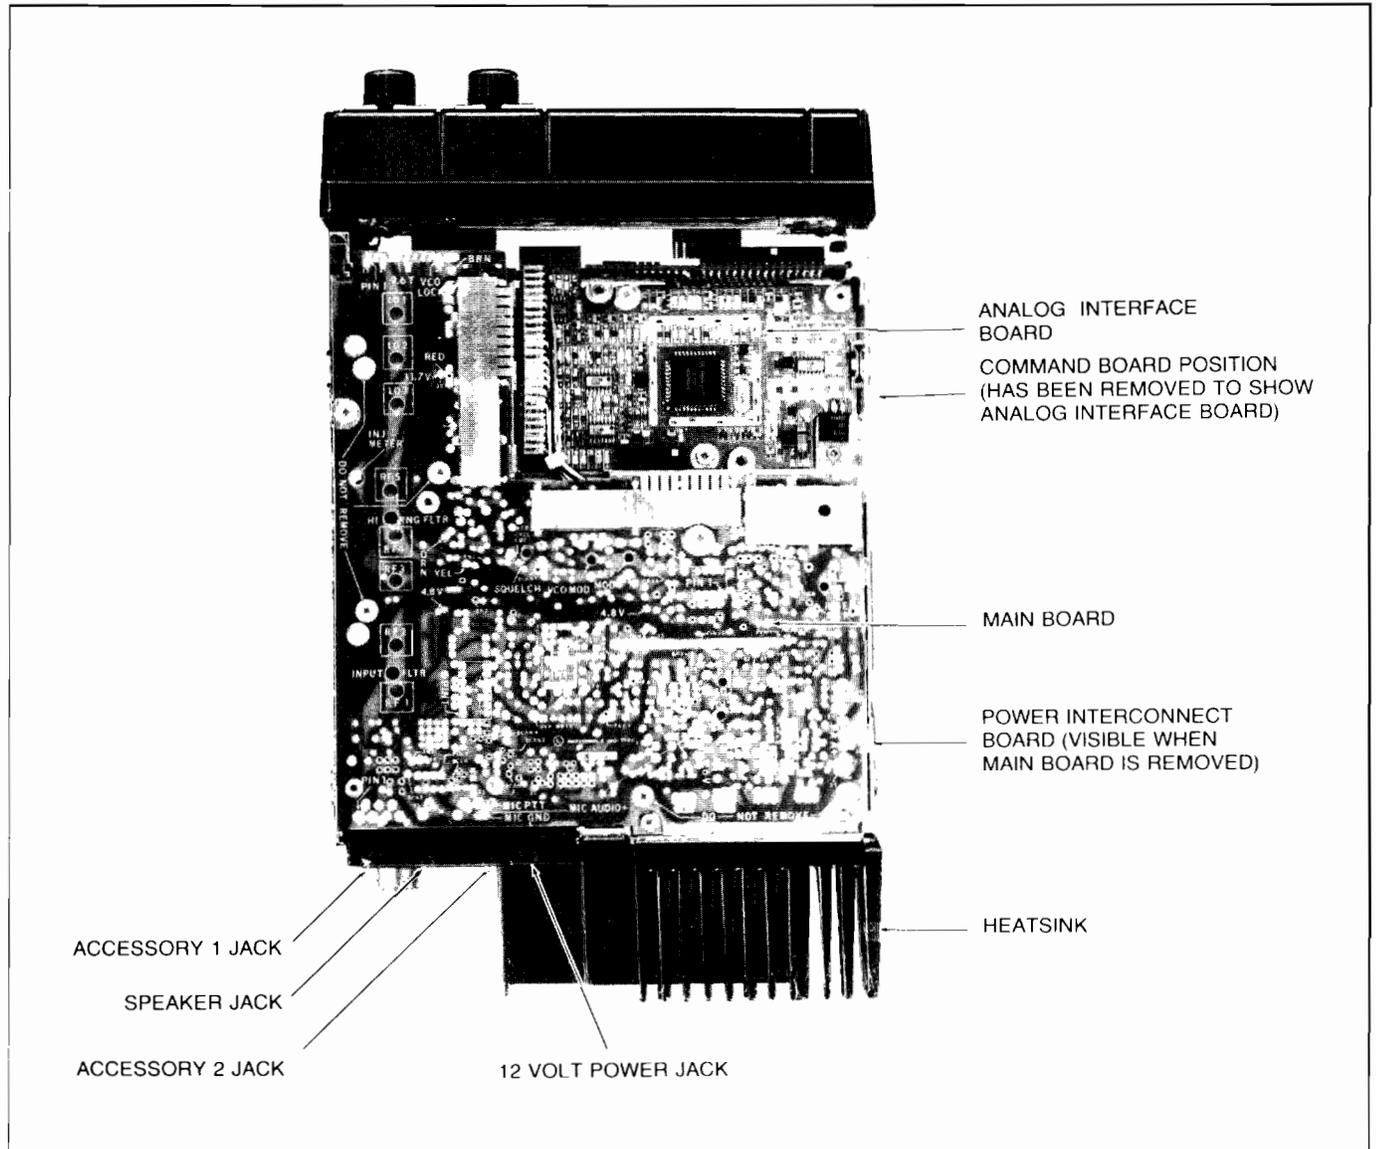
MCX1000 Radio Top View with Cover Removed
